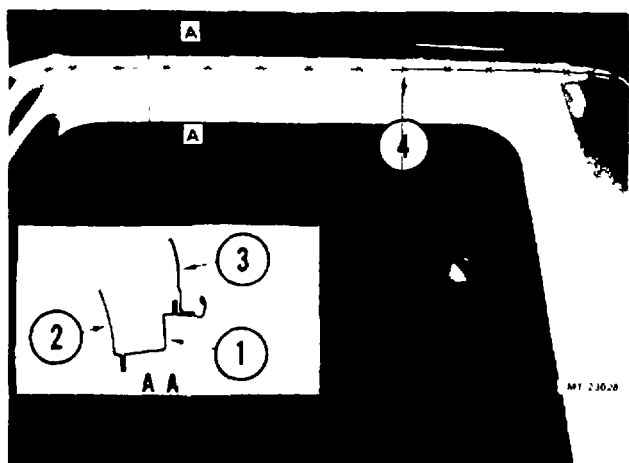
Side Panel to Outer Roof Panel Spot Welds
